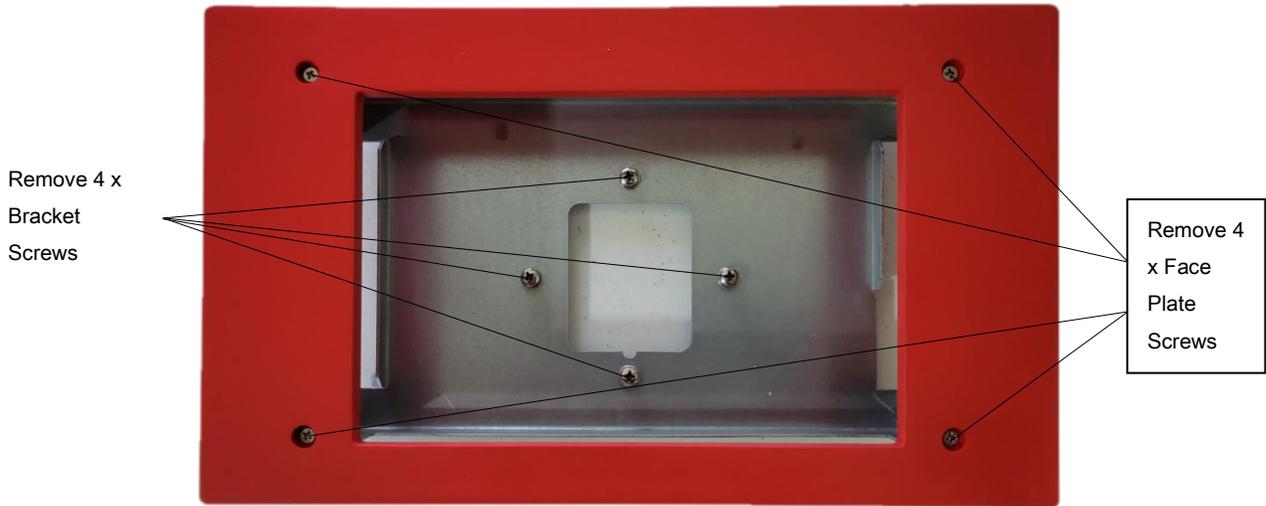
APV3-DAS - Flush Mount Kit Face Plate and Bracket Screw Removal
